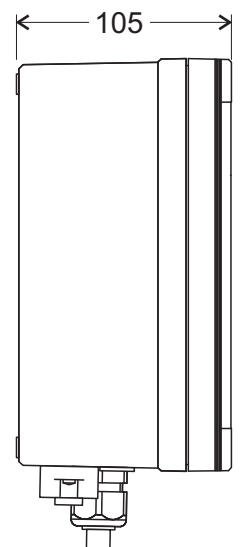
Dimension drawing of the LF 170 (dimensions in mm)
